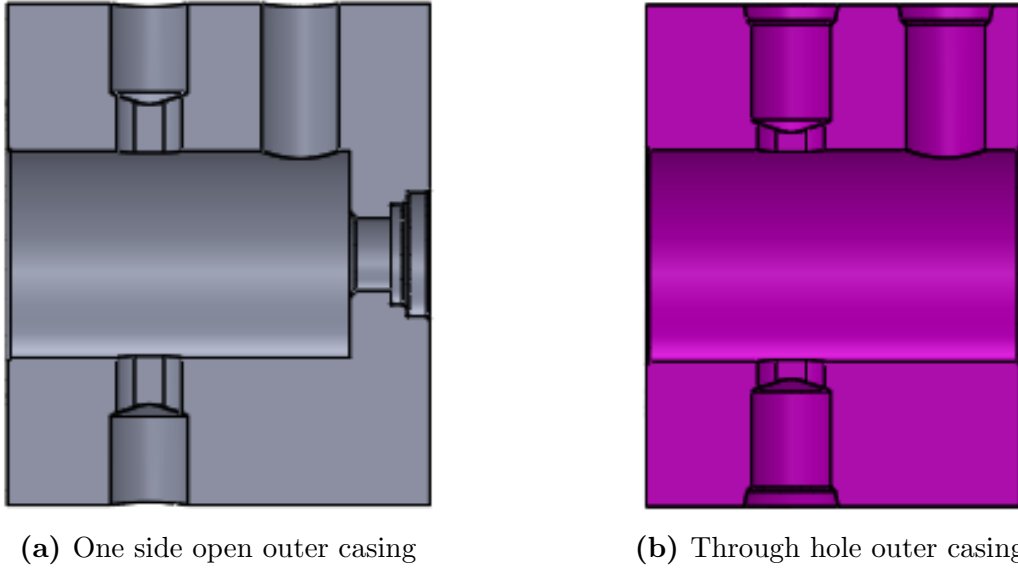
Changing the original spool valve outer casing to be a through hole design
